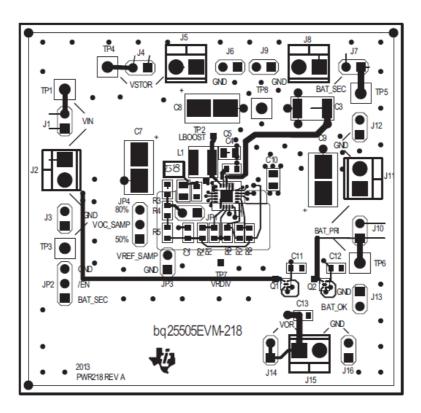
EVM-BQ25505 top assembly [A.25]
